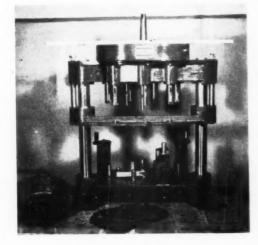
One type of drillhead, suspended bushing plate, and fixture which was used for drilling a worm gear case and cover, as well as tap the case. This was done by placing tap holders in the spindles and removing the drill bushings from the bushing plate.
